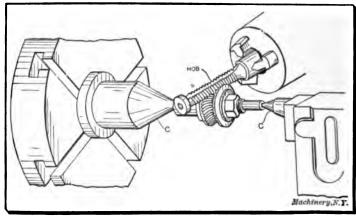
Cutting a Concave Knurl by a Hob in the Milling Machine
